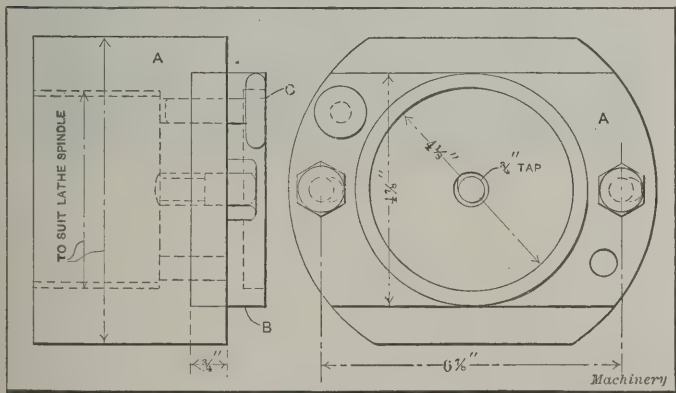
Fixture for Holding Casting when turning, facing and cutting-off Piston Rings
